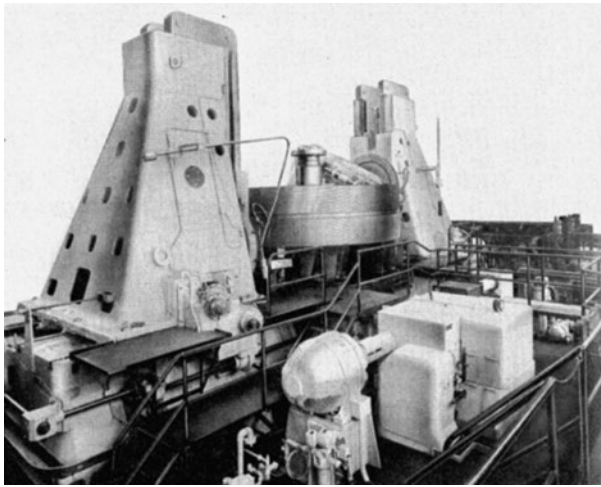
A large hobbing machine used to cut precision gears for large ships. (Courtesy of General Electric Co., Lynn, Massachusetts.)
